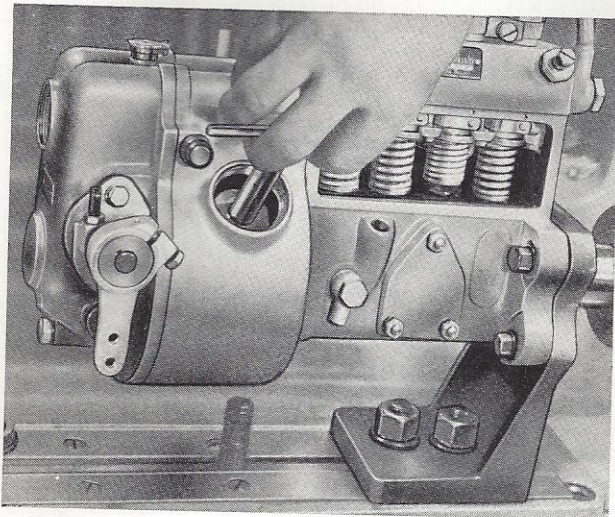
Adjusting the fly-weight opposing springs using wrench A 527008.
